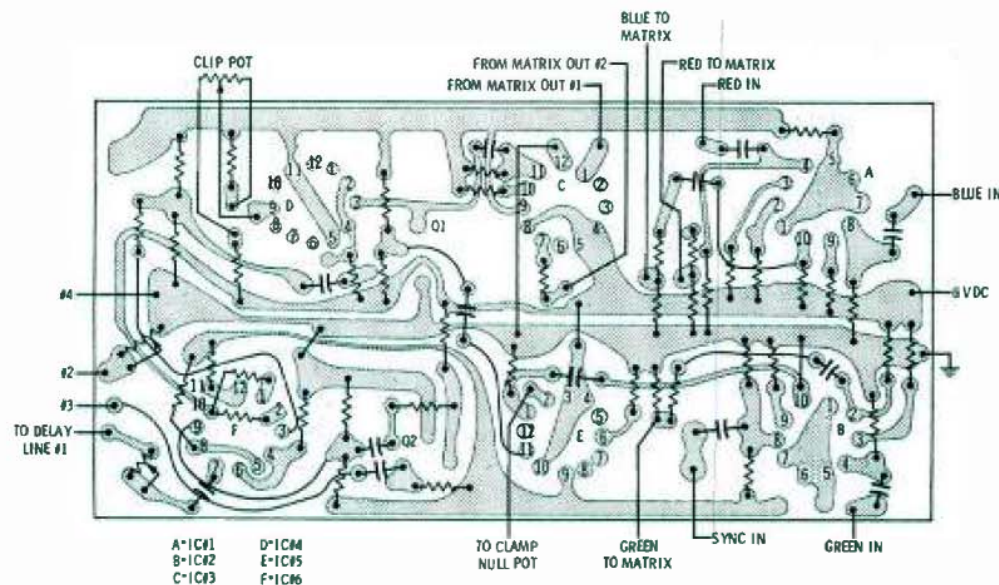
Bottom view of printed circuit board parts layout. Top view shown in Fig. 3
